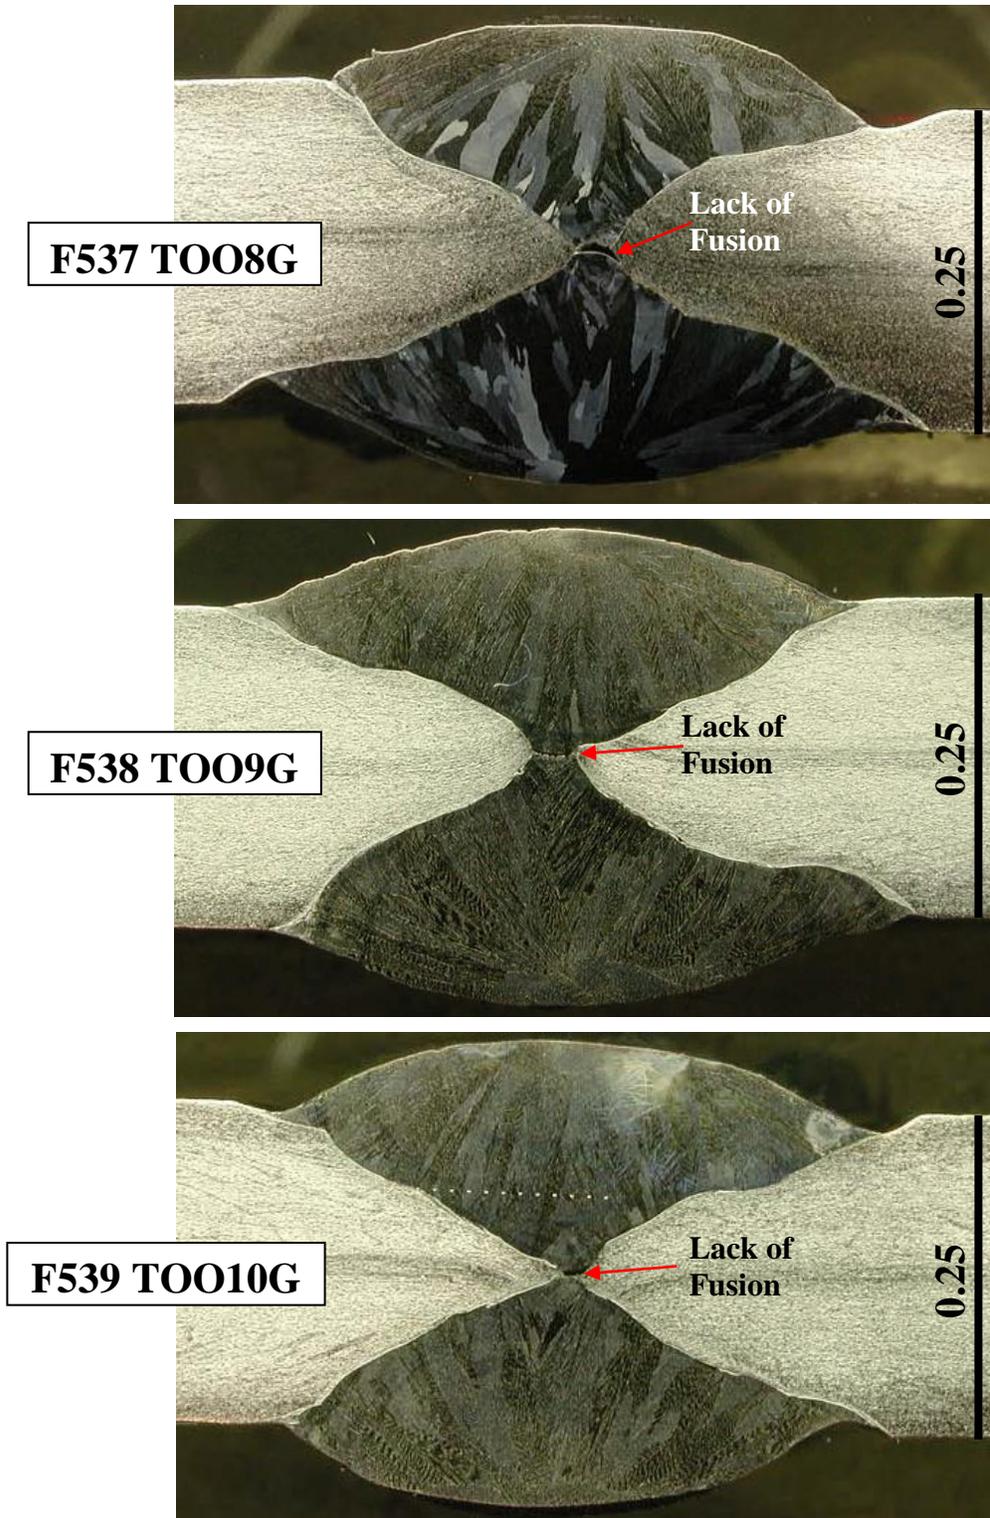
Macrostructure of the ERNiCuRu Test Welds Showing Root Lack of Fusion Defects and Undercuts in Welds T008G and T0010G
